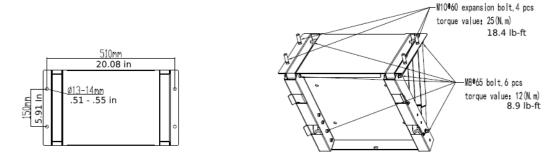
Dispenser Mounted on A Steel Frame or Gantry
